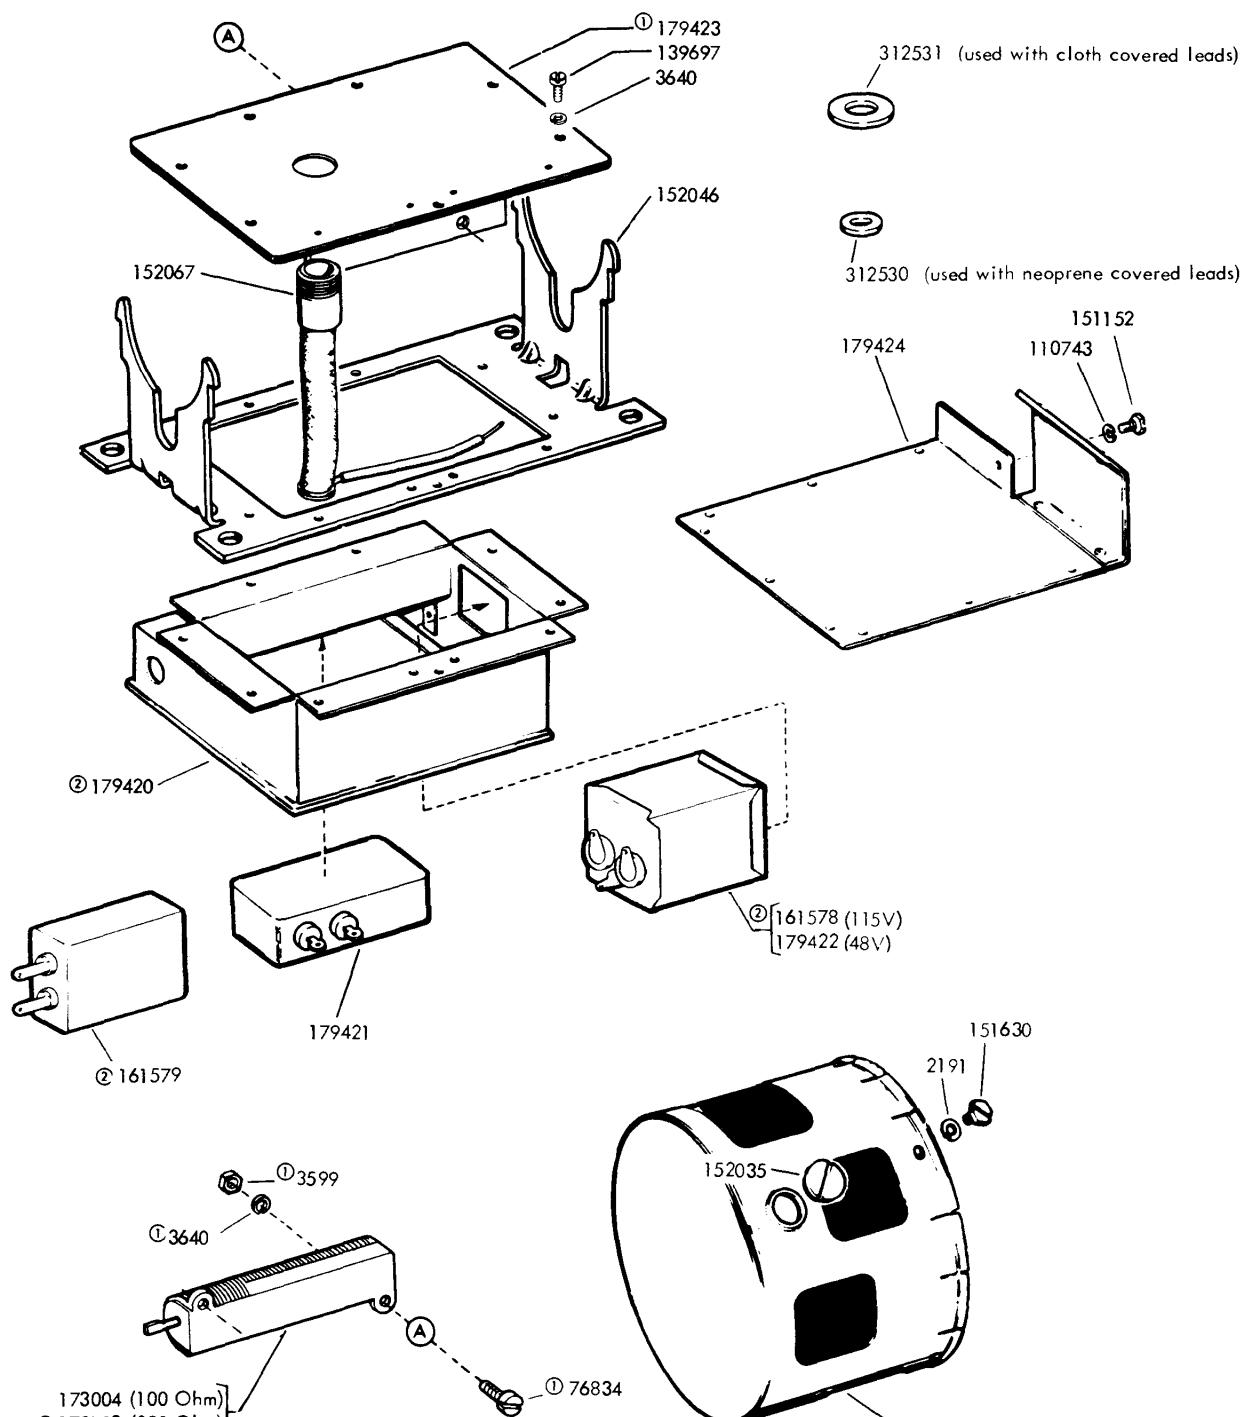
SERIES MOTOR MOUNTING PARTS
